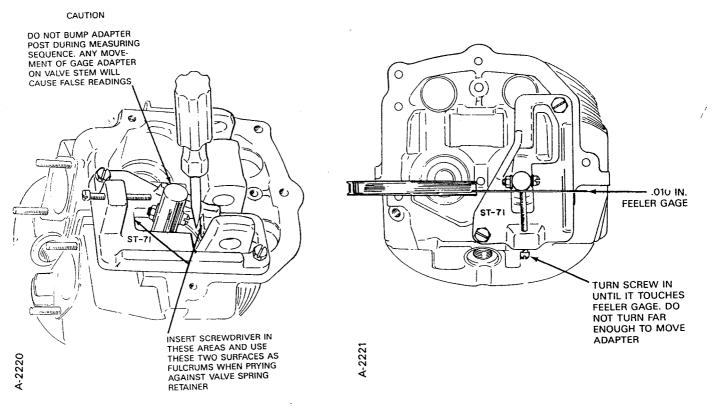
View Showing Screwdriver in Position to Move Exhaust Valve Stem Figure 6. Feeler Gage in Position Between Set Screw and Adapter Post
